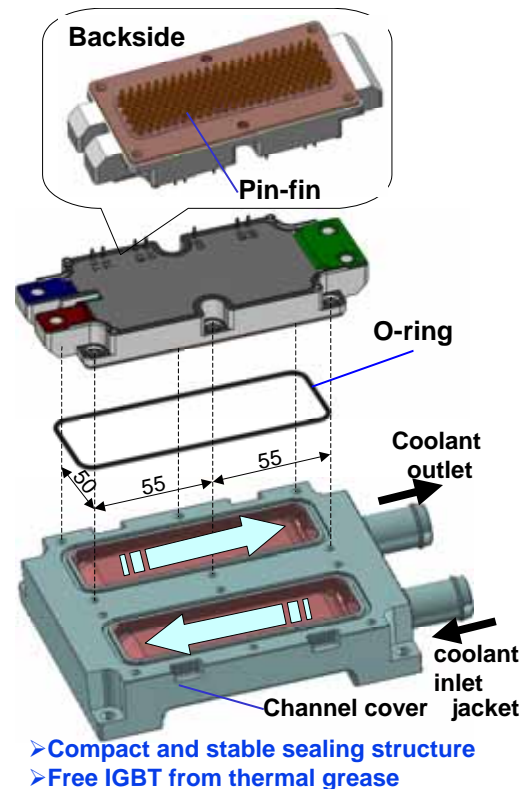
Exploded view of new IGBT module and exclusively designed channel cover jacket
